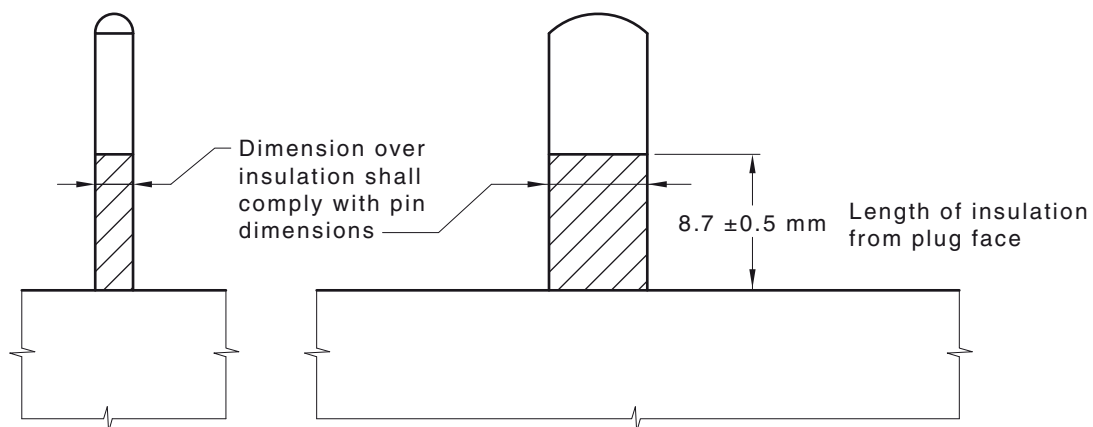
DIMENSIONS OF INSULATION ON INSULATED LIVE PINS
